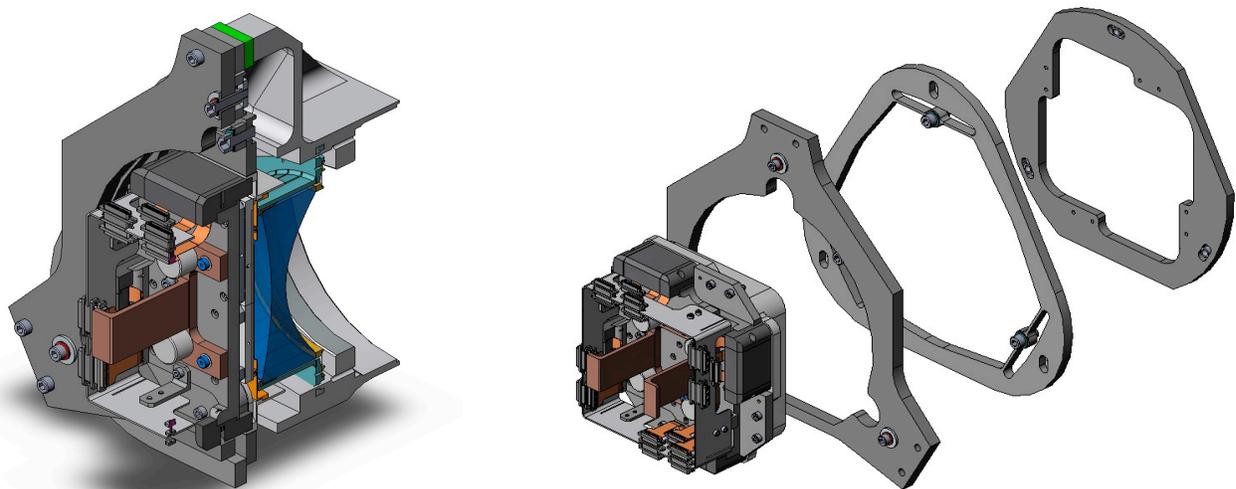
Cutaway (left) and exploded (right) views of the detector mount assembly. Copper bus bars for thermal straps protrude from the back of the detector mounting block. On the left, the steep concave aspheric shape of the field flattener lens can be seen. On the right, the middle aluminum plate has mounting flexures for the following Invar plate.
